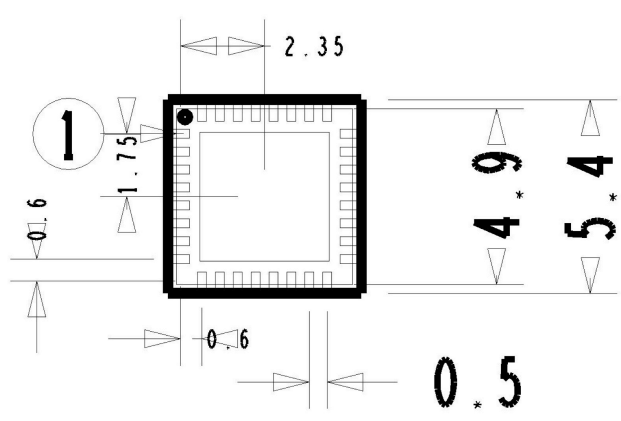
Suggested PCB layout for the integration of the bPOL12V_V4 QFN32 package.
